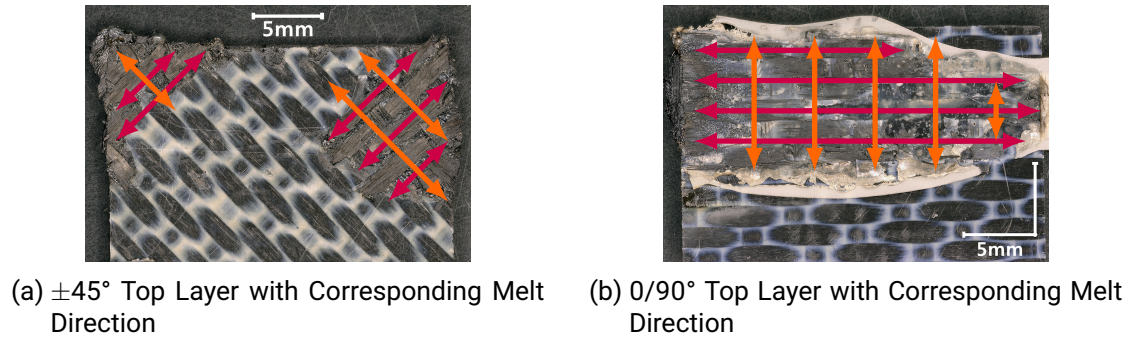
Observed Failure Modes on Fracture Surfaces
